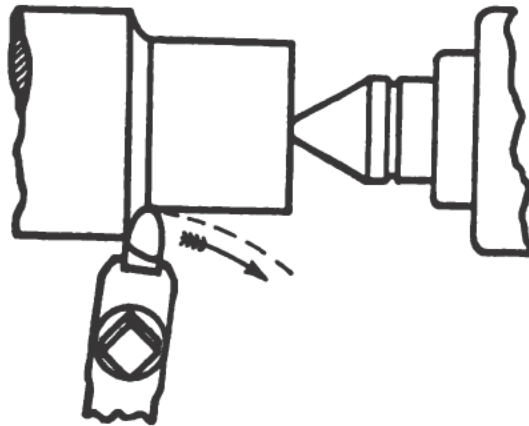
Position of the turning tool taking a heavy cut on large work.
